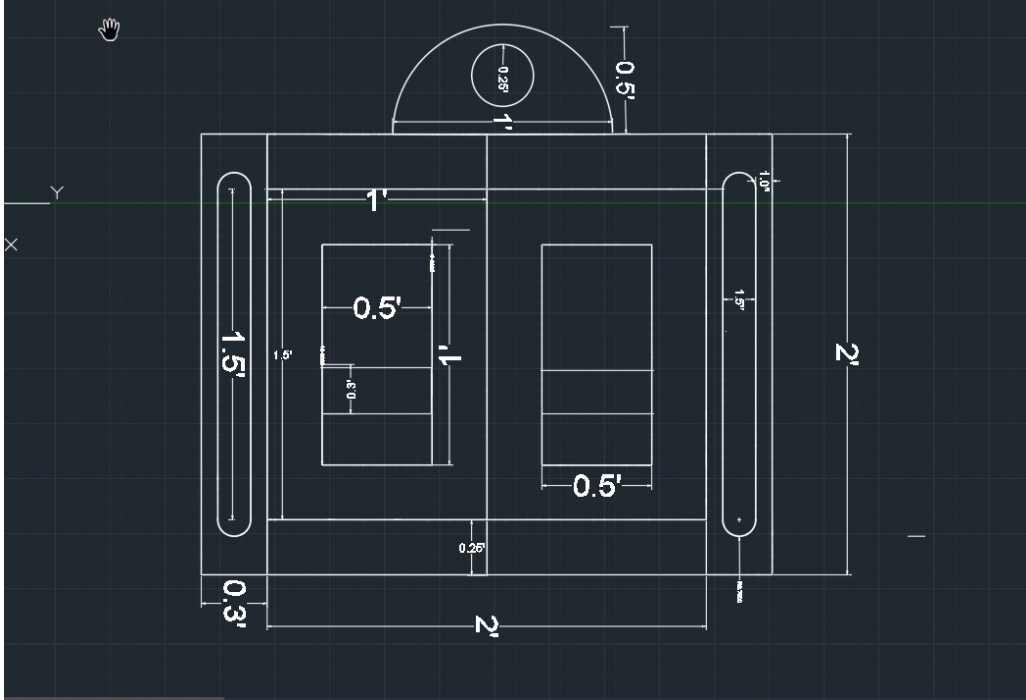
An 2-dimensional AutoCAD drawing of our hypothetical design with appropriate dimensions in ft.
